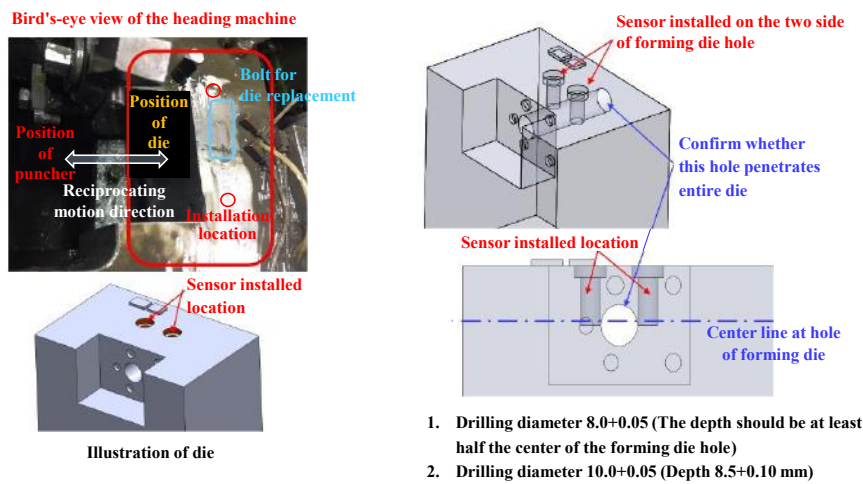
Installation Position on Both Sides of the Forming Hole at the Mold End
